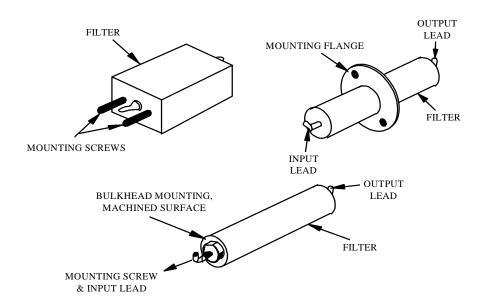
Typical Feedthrough Filters for Bulkhead Mounting
